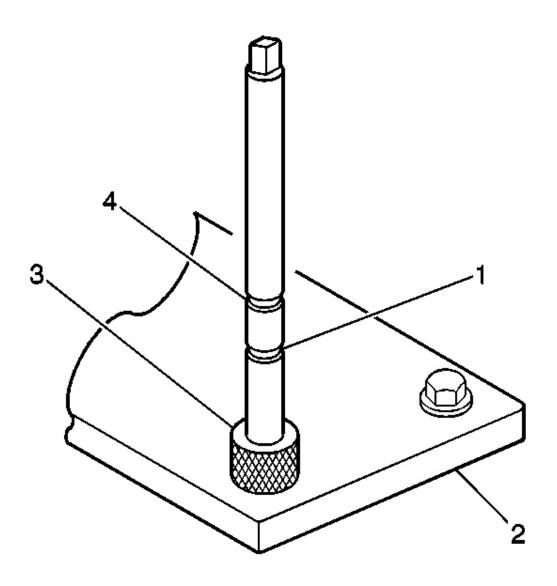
View Of Tap Upper & Lower Marks, Fixture Plate & Bushing Courtesy of GENERAL MOTORS CORP.
